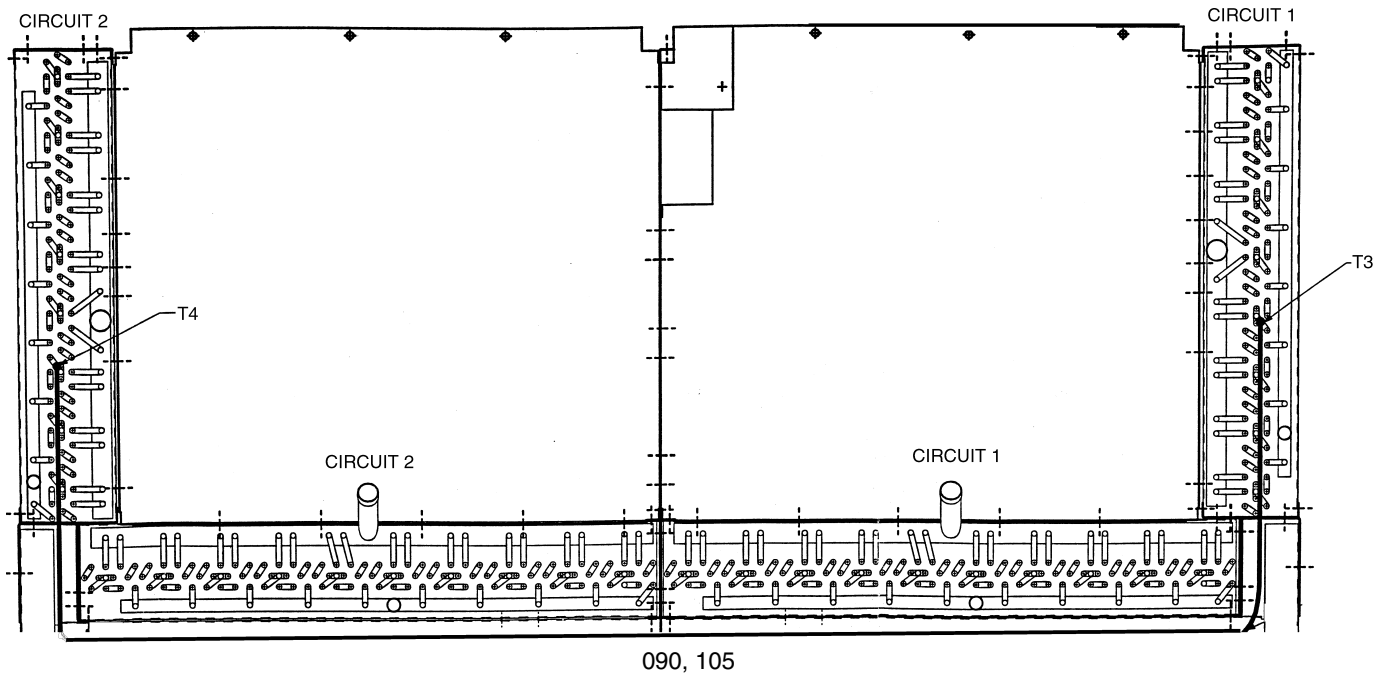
Thermistor T3 and T4 Locations, Size 055-105 Units; Header End of Coil (cont)
